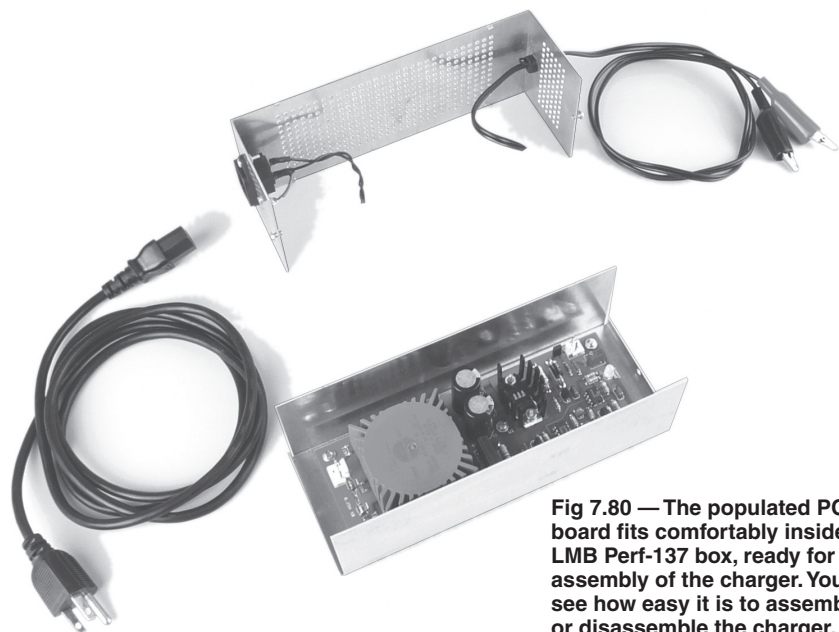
The populated PC board fits comfortably inside the LMB Perf-137 box, ready for final assembly of the charger. You can see how easy it is to assemble or disassemble the charger.
